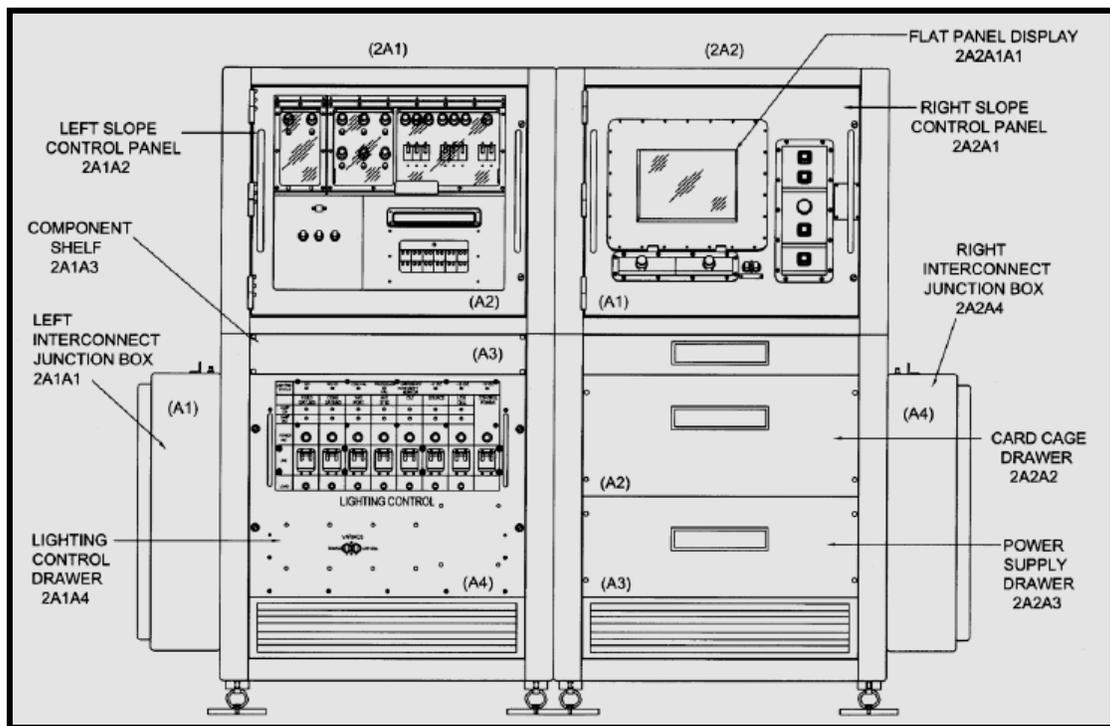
Lens Room Electronics Enclosure Assembly.
